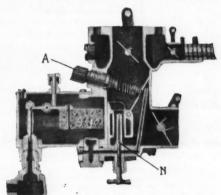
SECTION OF MARVEL CARBURETER Showing the points of adjustment
